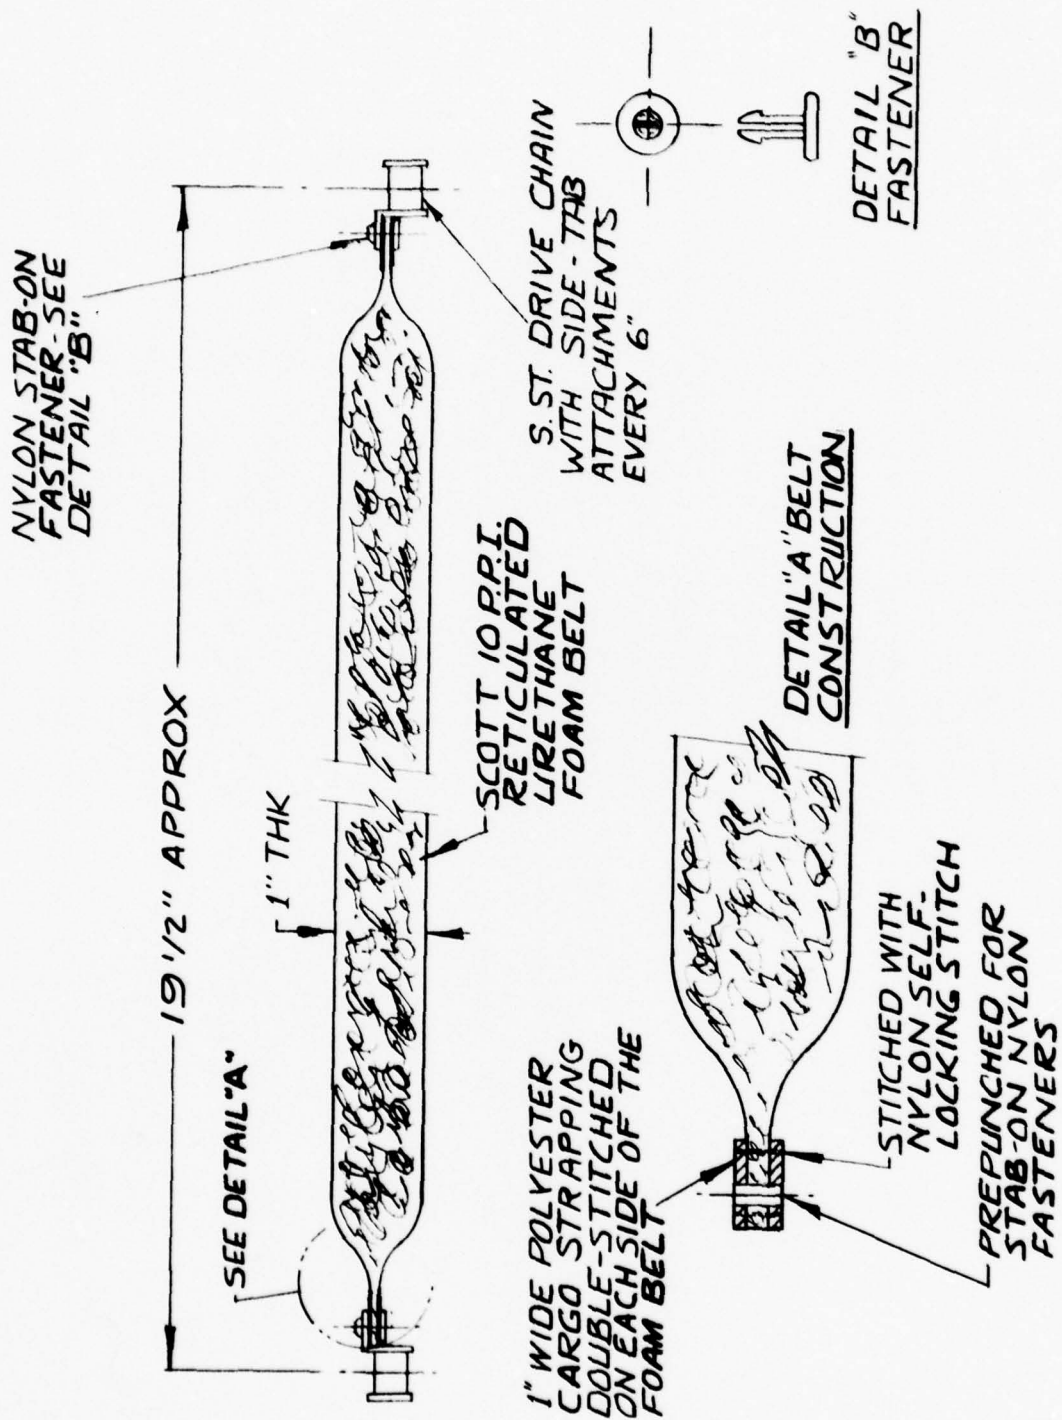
BELT CONSTRUCTION (END VIEW)
